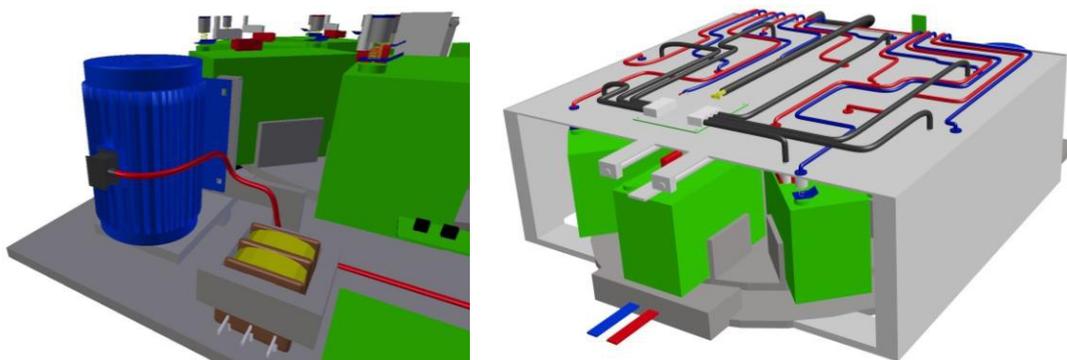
(a) Possible location of the electric motor, (b) Cables
